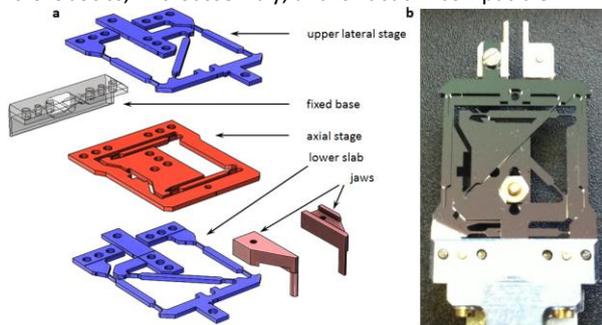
CAD exploded view (a) and photograph (b) of the micro-gripper.
